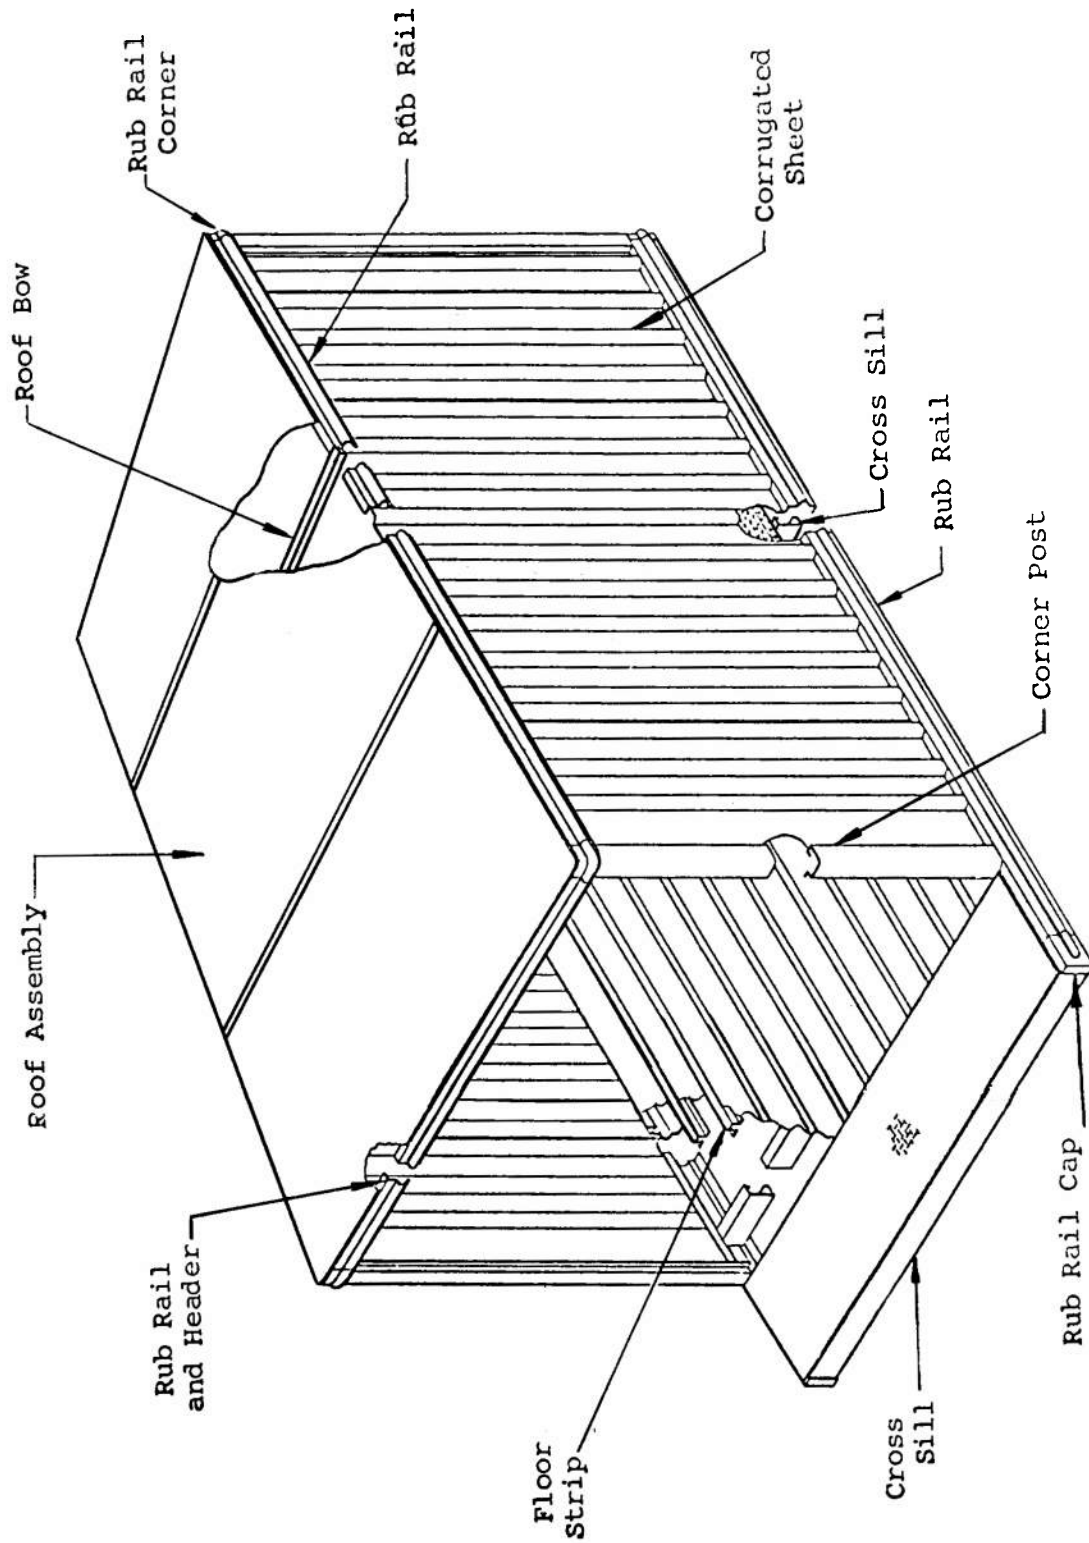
Van Body, Corrugated Sheet Wall Construction<sup>96</sup>
